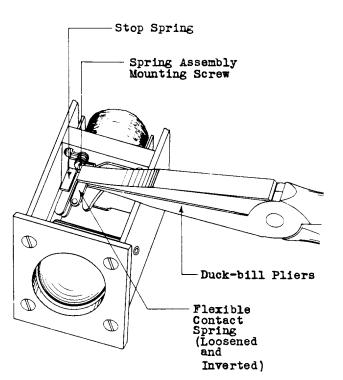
Method of Straightening Upper Flexible Contact Spring
